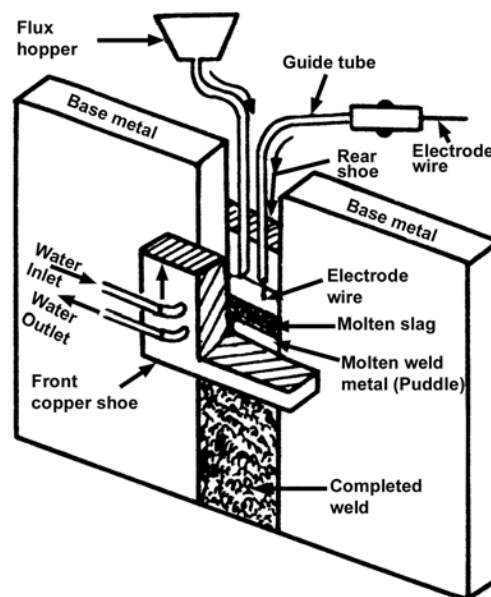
, Schematic diagram of electroslag welding. The copper shoe at the front side is shown in section to show the welding details.
